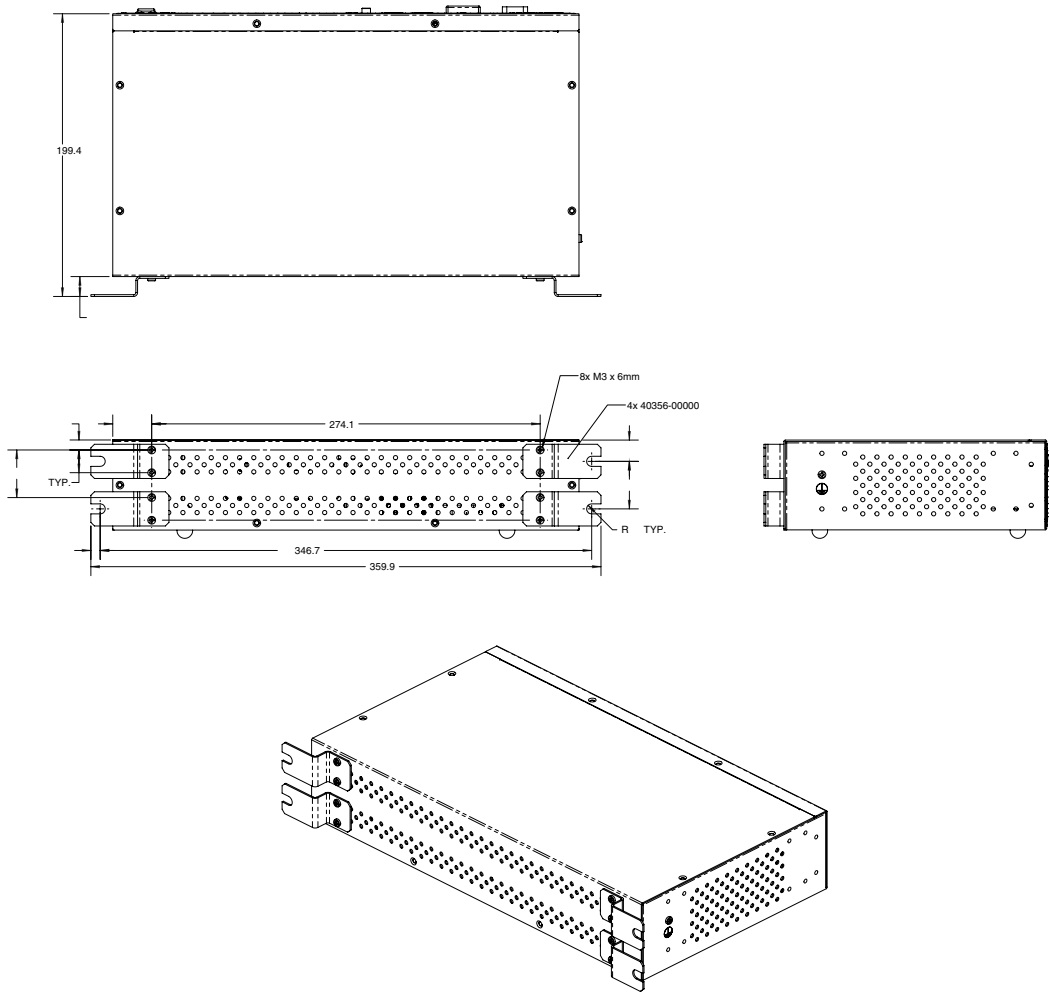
Panel-Mounting the Adept SmartVision EX
